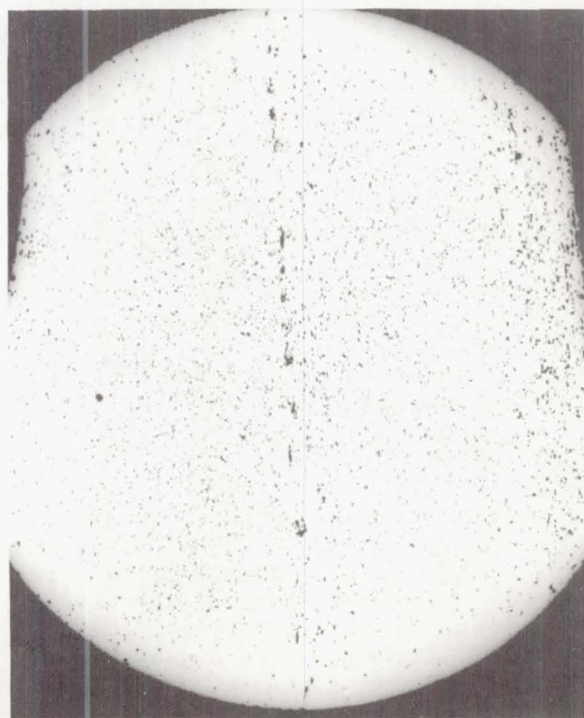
Sample of Explosive Weld - Straight Sleeve Joint
